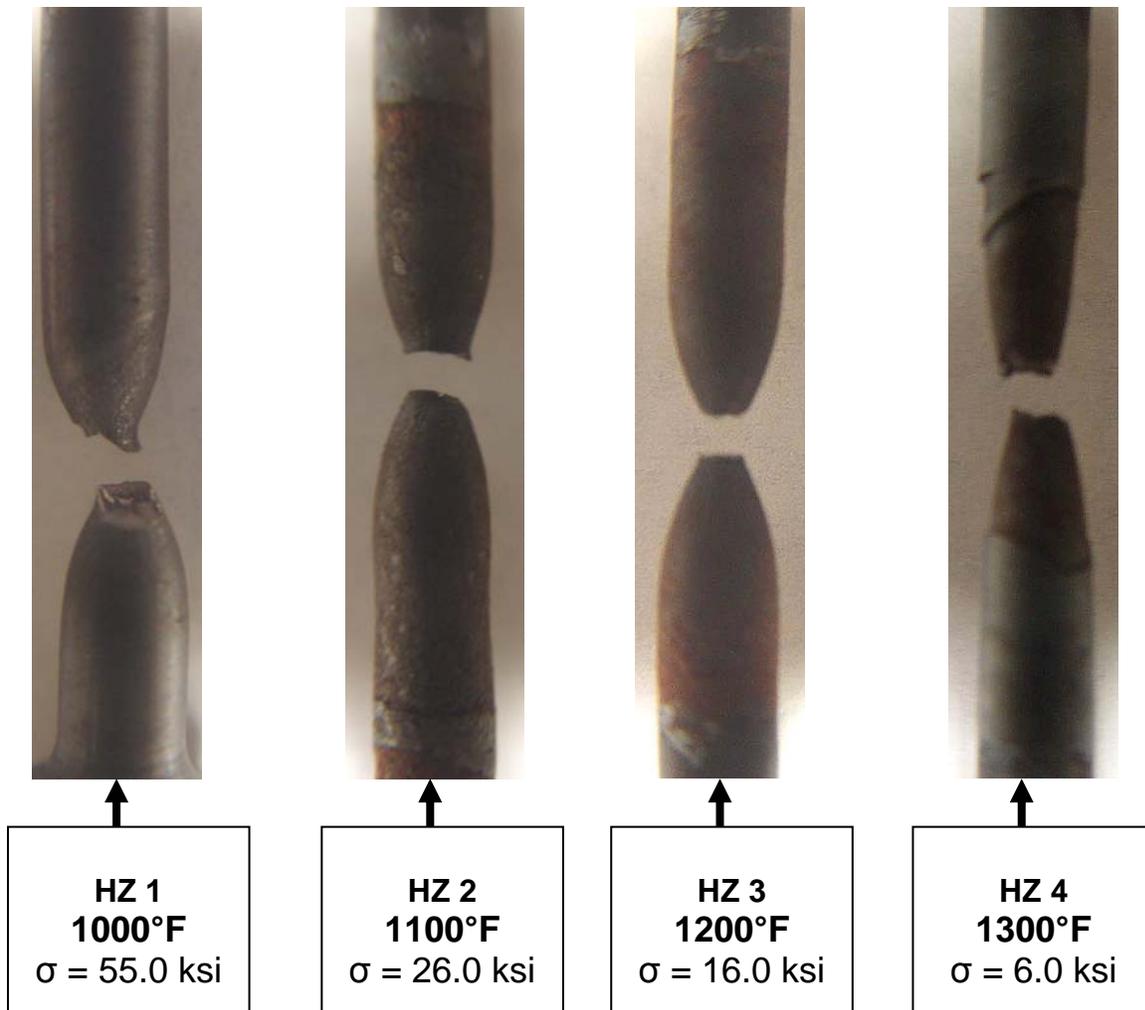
Creep-tested weldment specimens from submerged arc weld HZ.
